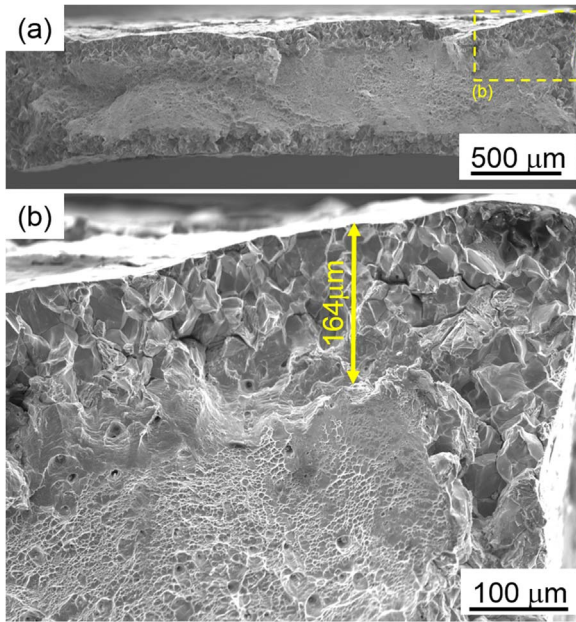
(a) Overview of fracture surface of specimen with hydrogen charging. (b) Magnified image of region outlined in part (a).
